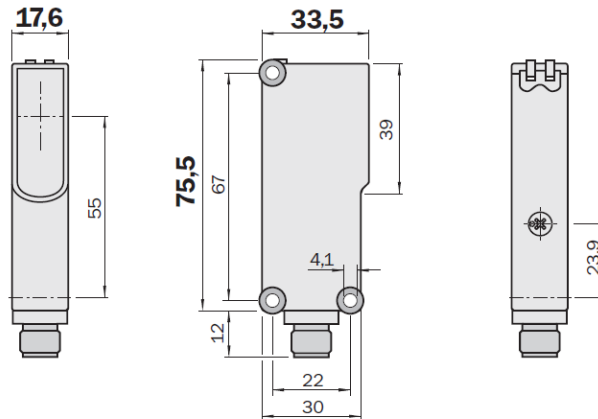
Photoelectric retro-reflective sensor dimensional drawing
